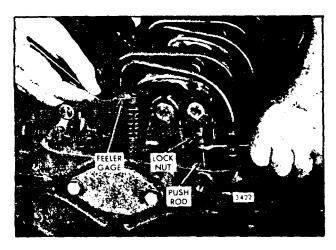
Adjusting Valve Clearance (Two-Valve Cylinder Head)
